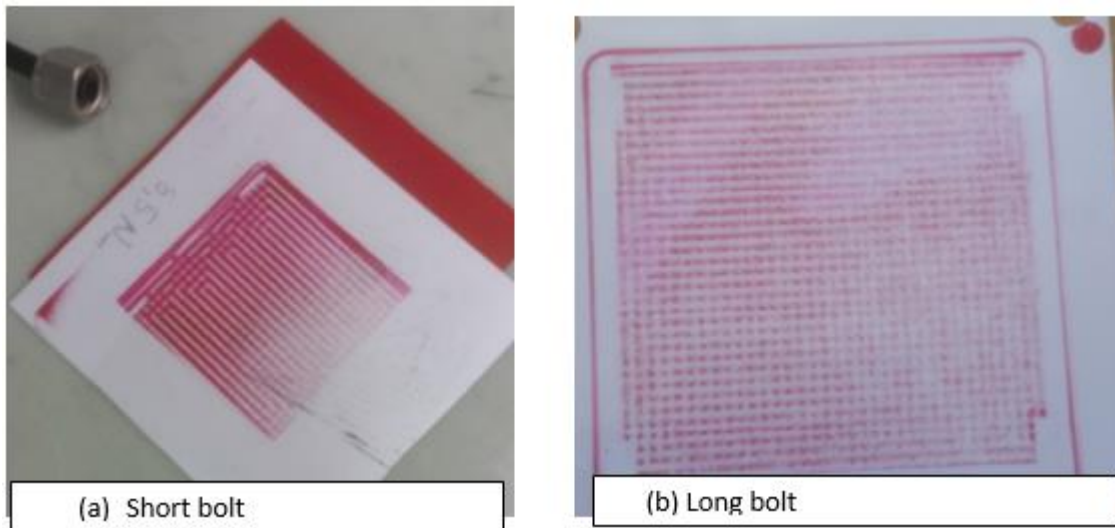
Pressure paper test of Short knot and Long knot cell fixture.
